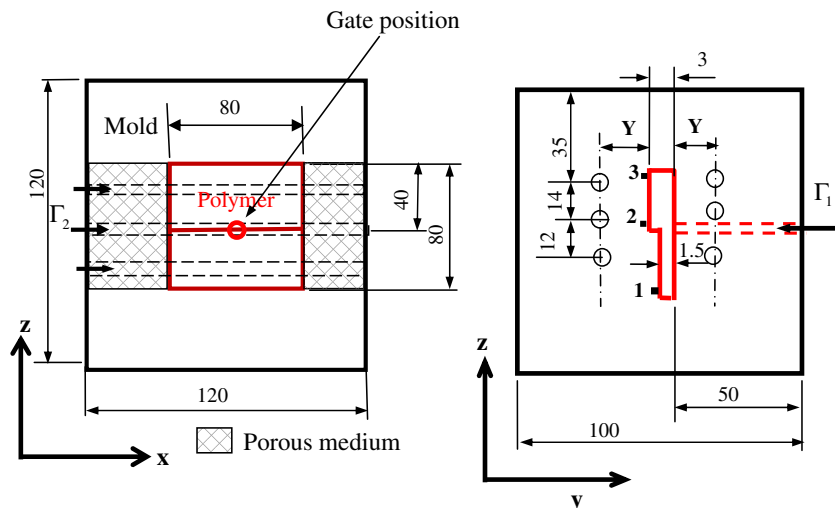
Configuration of the mold, mold cavity and cooling channels.
